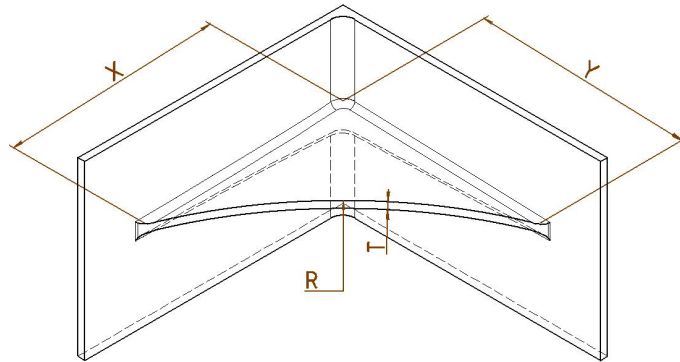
Drawing of model 1 single rib (M1 single) with the parameterized dimensions.
